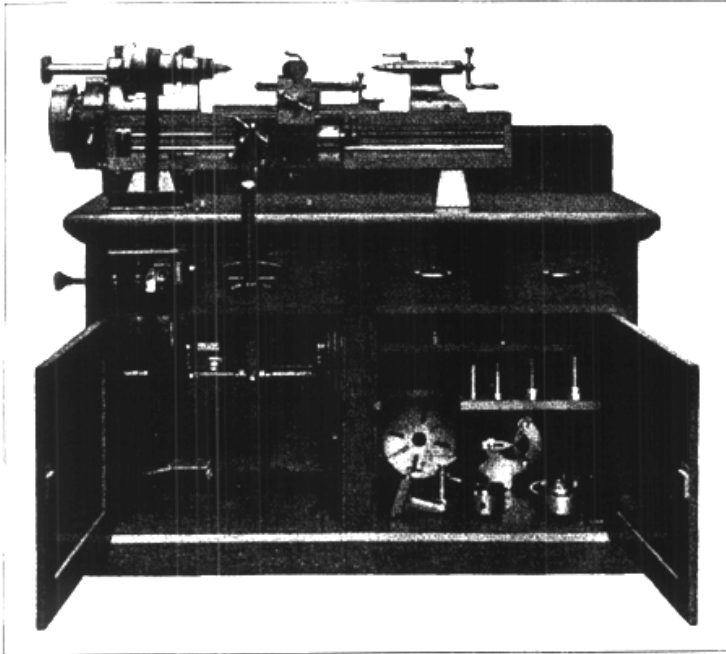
Rivett 608 back geared screw cutting lathe on cabinet with Speed Box Motor Drive, hand lever control
